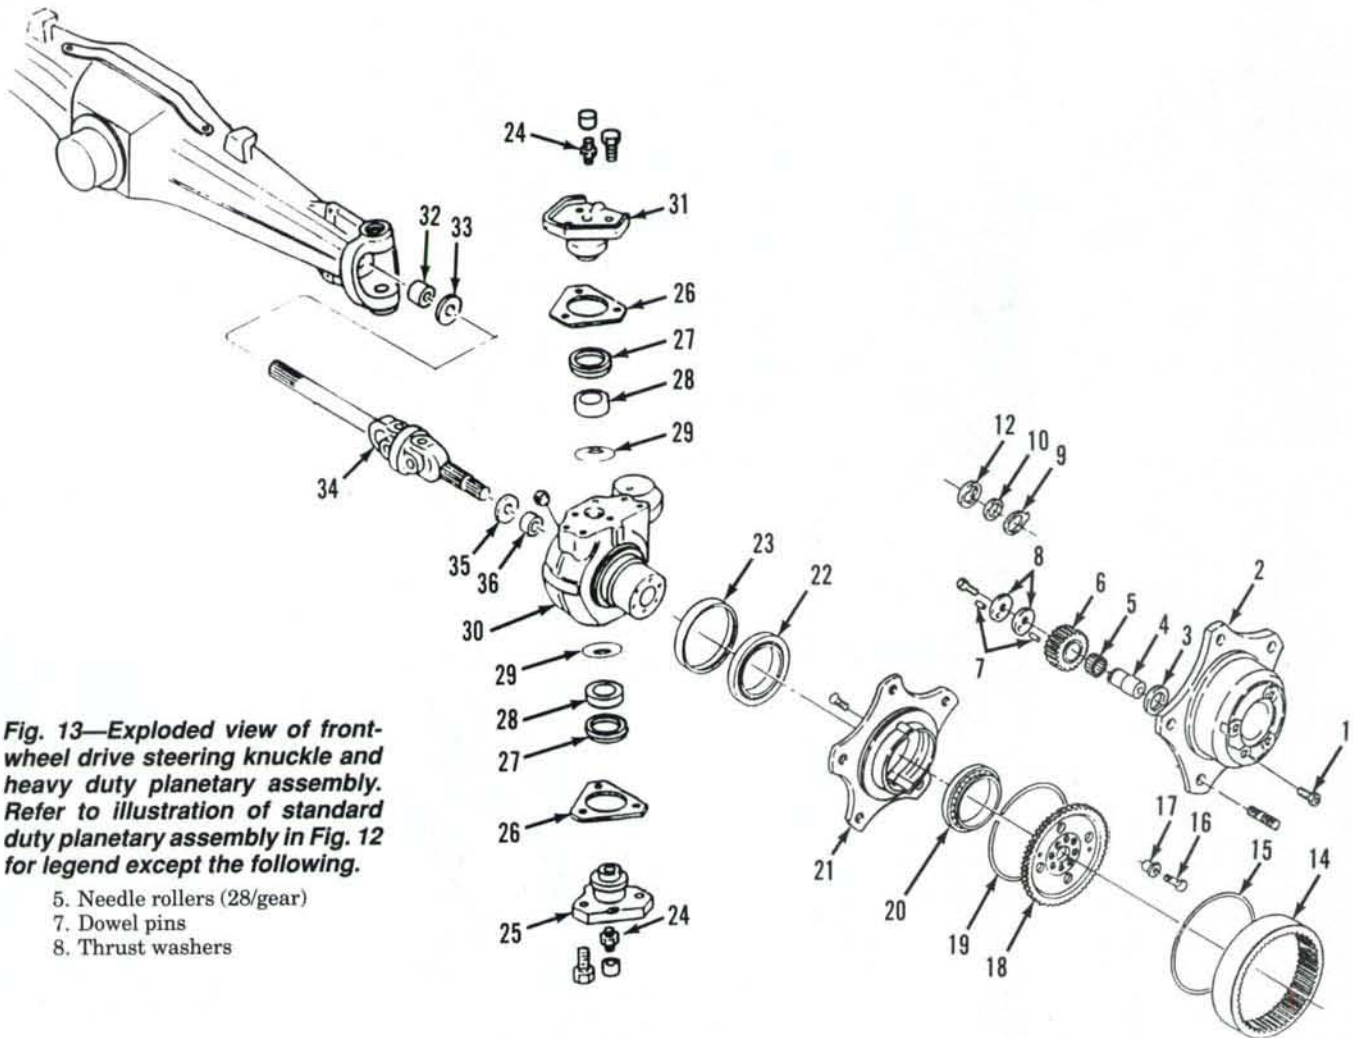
Exploded view of front-wheel drive steering knuckle and heavy duty planetary assembly. Refer to illustration of standard duty planetary assembly in Fig. 12 for legend except the following.
